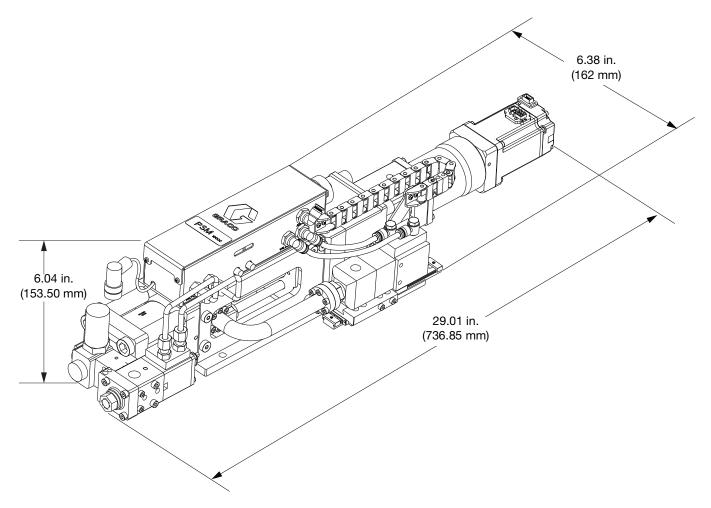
PSM Metering Unit Dimensions, 100 cc
